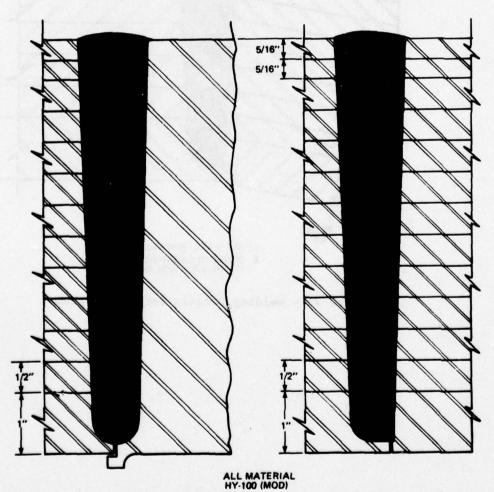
Welding Details for Circle Seams 2, 3, and 4
